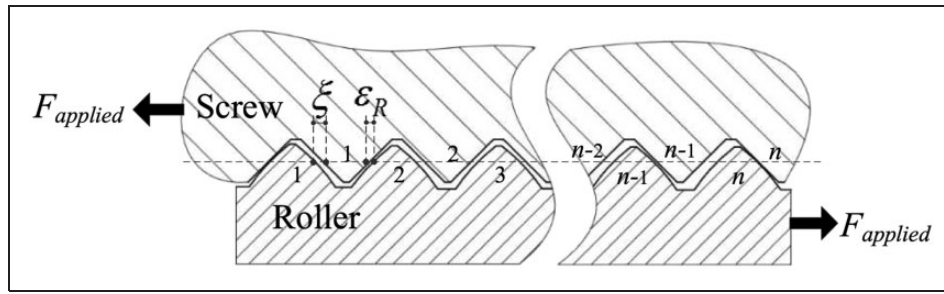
Redesign of thread form parameters when screw withstands tension (the initial contact condition before bearing load).
